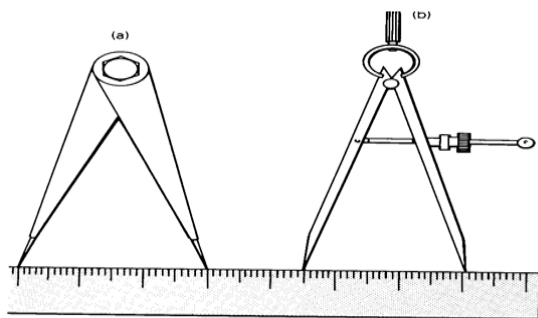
Setting dividers: (a) firm-jointed type; (b) spring-controlled type.
